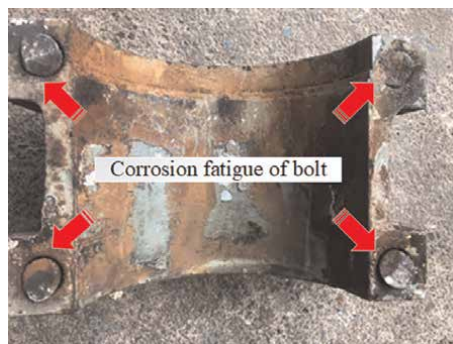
Macroscopic view of a typical corrosion-fatigue fracture surfaces.
